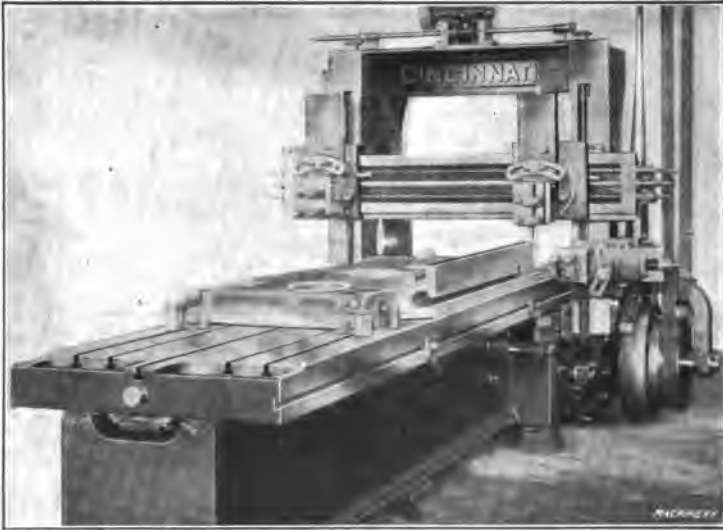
Planing Top Edge and Side of Casting—Illustrating use of Side-head
